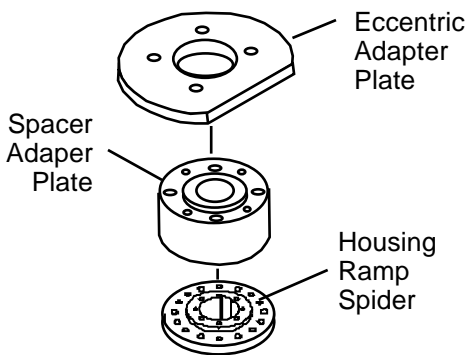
FS-40/50-RD Feeder Spindle Assembly
